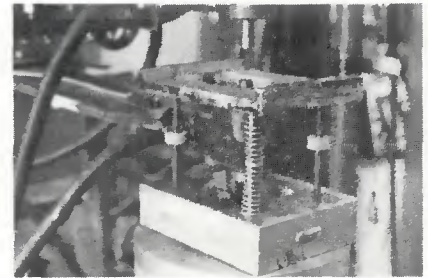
Special jig used to locate sample weld coupons
